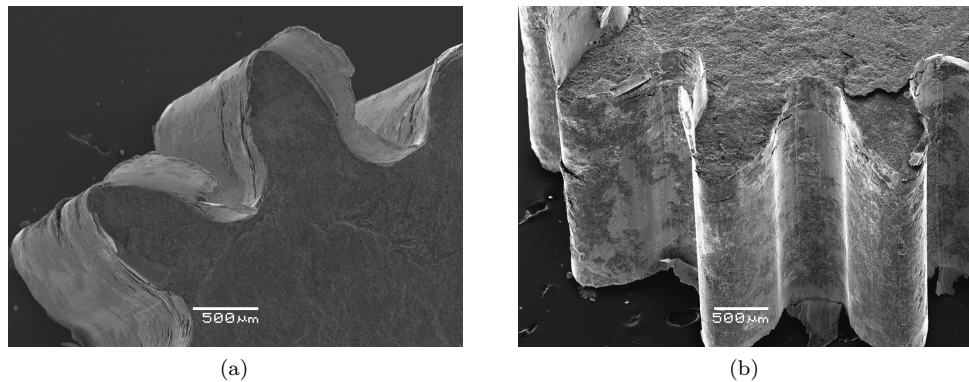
SEM micrographs of the gear wheel specimen formed at 430 °C. SEM micrographs of the gear wheel specimen formed at 430 °C. Figure (a) show the thin rim formed in the clearance between the punch and the die. Figure (b) depicts the gear wheel specimen from a different angle, where the remains of the MoS₂ lubricant is clearly visible as a flaky layer on the top of the specimen.
